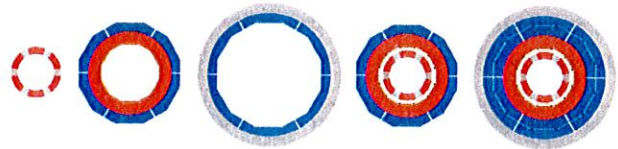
(Color online) Assembly and loading procedure. From left to right: sextupole-pad subassembly, solenoid-pad subassembly, yoke-shell subassembly, loading of sextupole-pad subassembly inside solenoid-pad subassembly, and loading of coil subassemblies inside shell-yoke subassembly.
